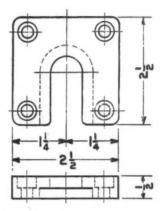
Drawing of special adapter used to attach the punch to the press ram.
